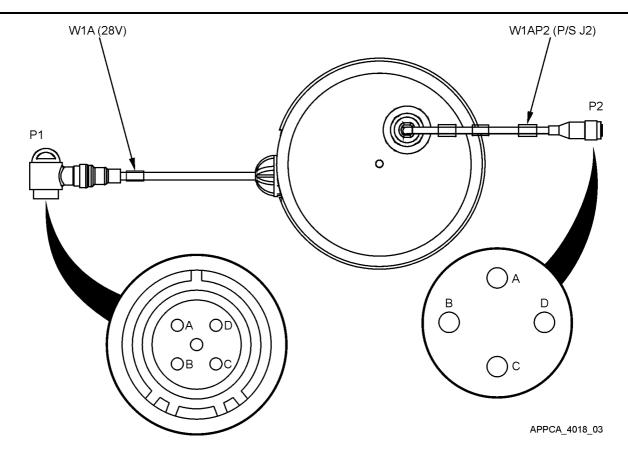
P/N 881317 W1A Cable Assembly (SICPS TENT)
